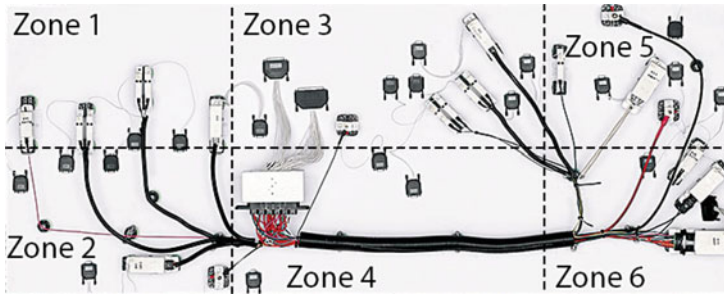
Illustration of the distribution of the fixtures on an assembly table and the definitions of the zones. As the fixtures move according to the assembly tables of the conveyor system, the fixtures are identically placed at every workstation–based on [4]
